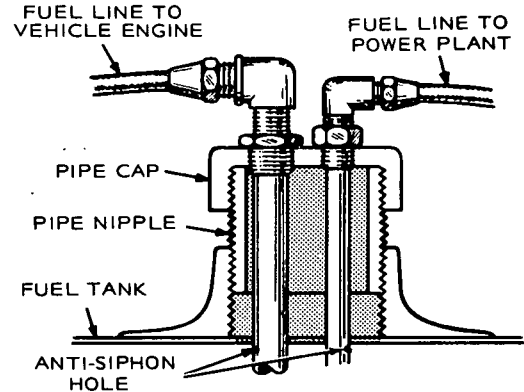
INSTALLATION OF SECOND DIP TUBE IN TANK OUTLET
